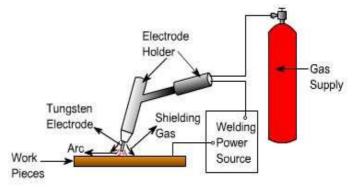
Schematic Diagram of TIG Welding System or set up
